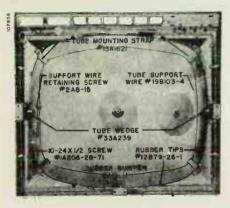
Rear View of Escutcheon and Picture Tube Mounting in Early Sets With Picture Tube Dag Grounded to Metal Cabinet and Escutcheon.
